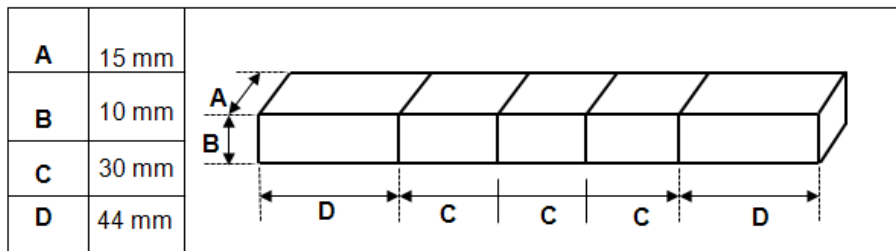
Dimension of the test pieces marked as (C) and run-on and run-off plates marked as (D)
